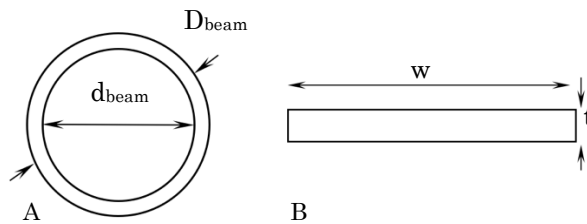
A: Cross section of circular beam. B: Cross section of support plate.
